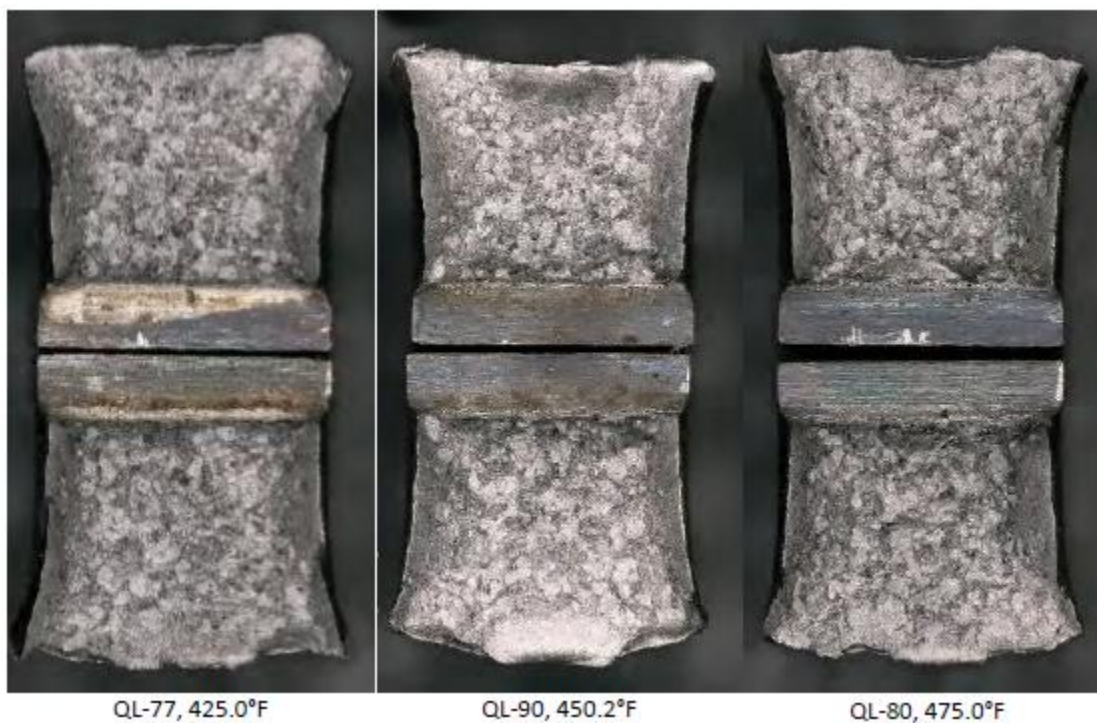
Photographs of Charpy Impact Specimen Fracture Surfaces, Base Metal Plate, Heat No. B4197-2, Transverse (TL) Orientation
